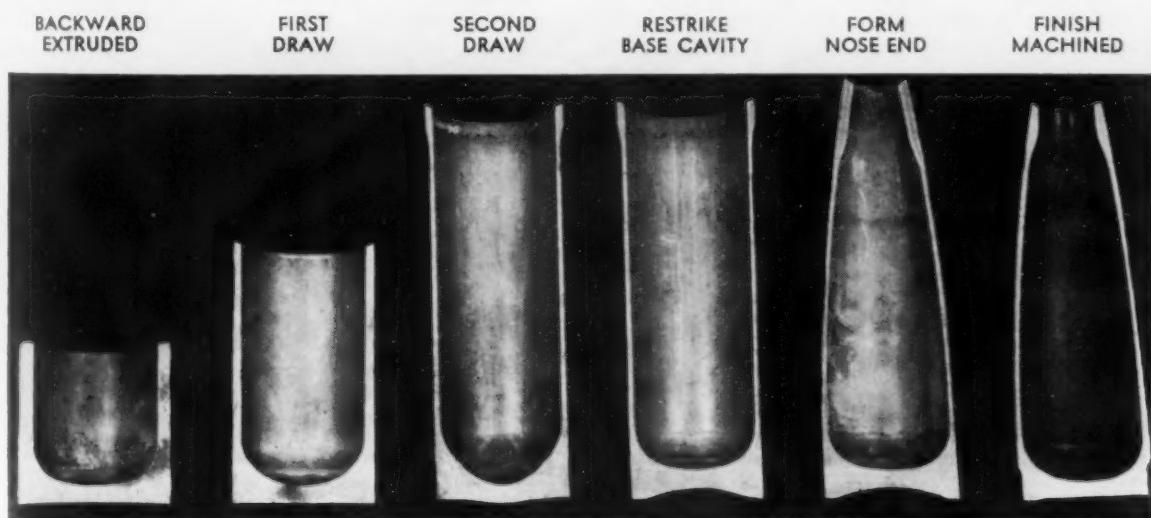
Cross-section of 4.5-in. rocket bodies showing steps in forming.
